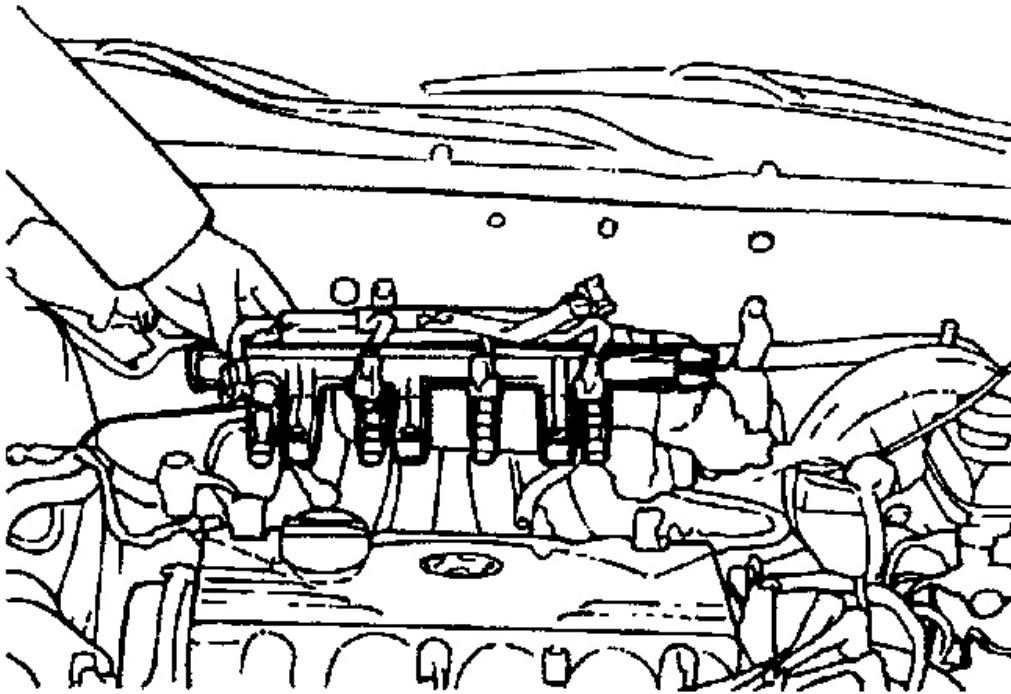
Identifying Fuel Delivery Pipe Assembly
